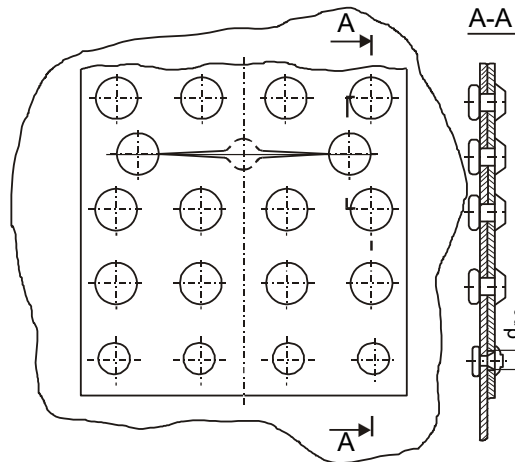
Fragment of panel with the center crack in repair strap installation area
